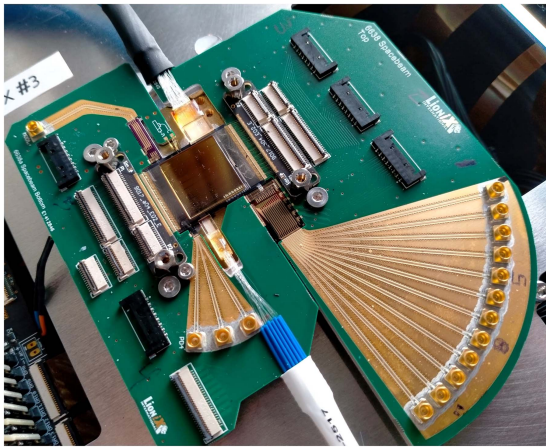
Photo of the hybrid assembly after wire-bonding to the PCB.
